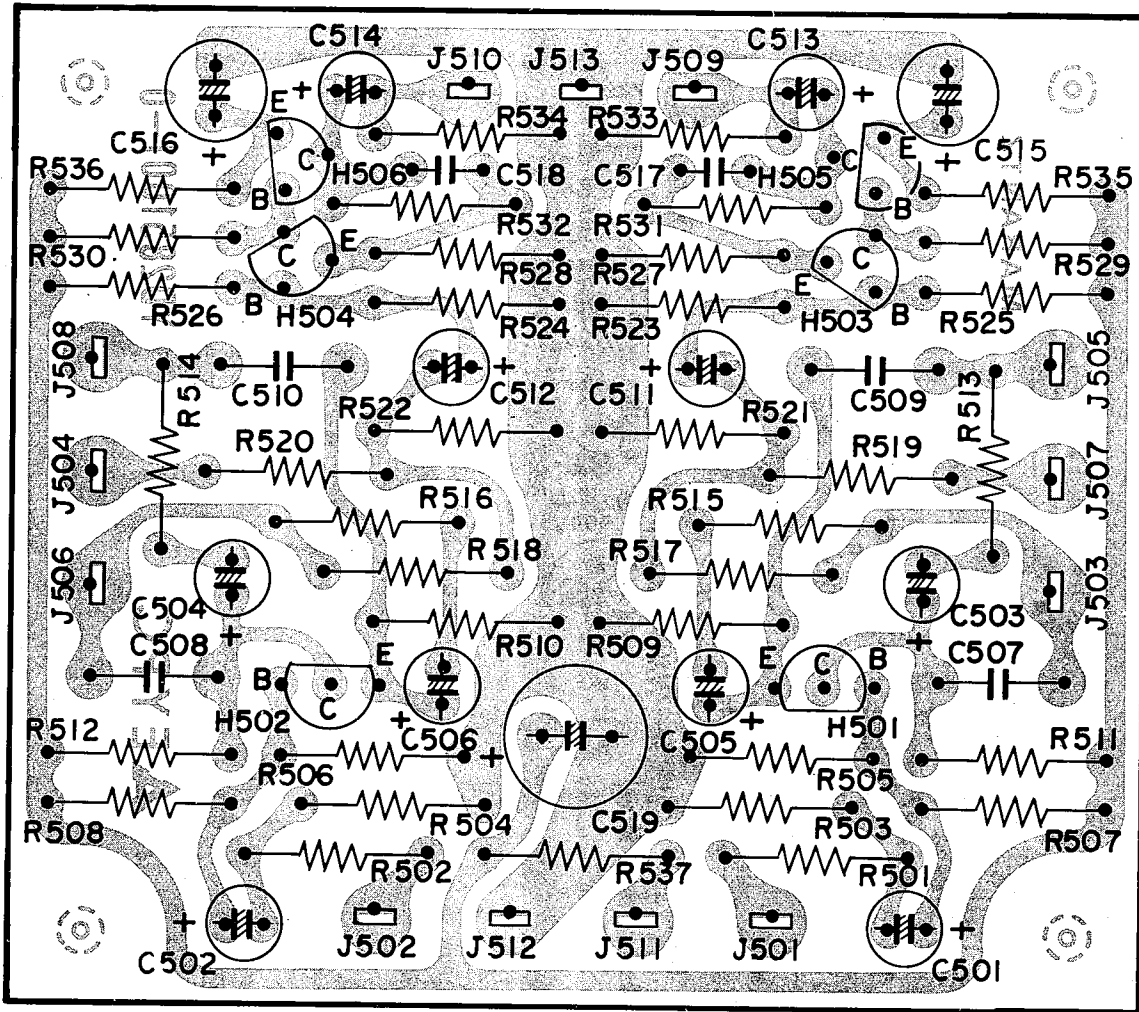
Vari-Matrix Unit Assembly P500 Component Locations
